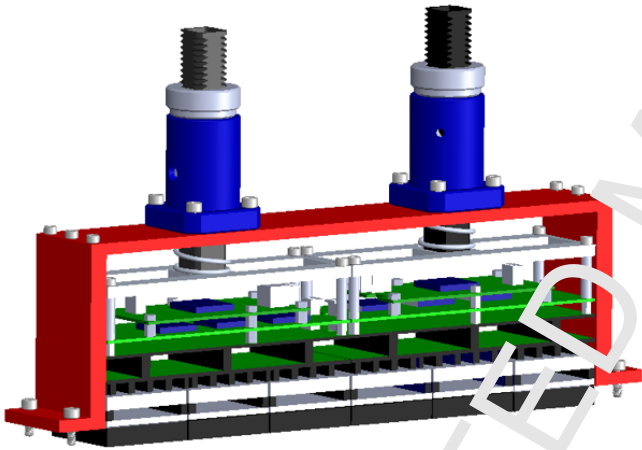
Technical drawing of the clamping fixture (shown in red) holding two electronics boards (shown in green). The two springs in the blue cases apply pressure to the boards, pushing the six MaPMTs to the window of the photon camera (not shown here).
